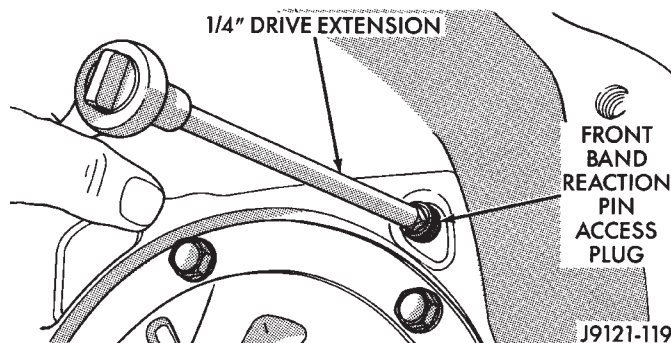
Removing/Installing Front Band Pivot Pin Access Plug
